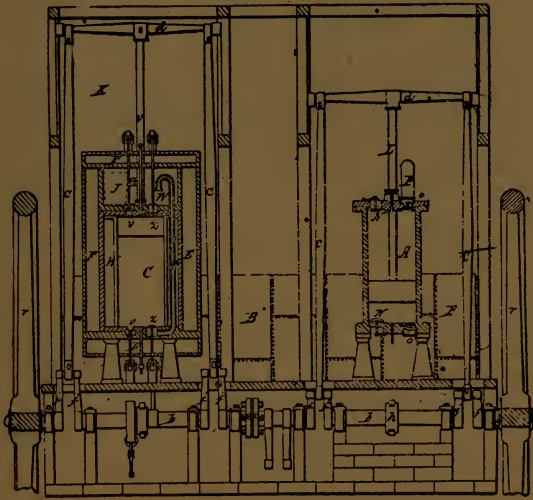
FRONT ELEVATION—THE EARLIEST ICE MACHINE.
